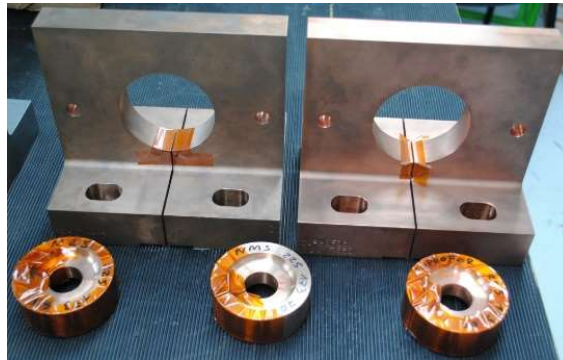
The single turn coil modelled and used in the pulsed magnetic technology for forming, crimping and welding processes @PFT Innovaltech.
